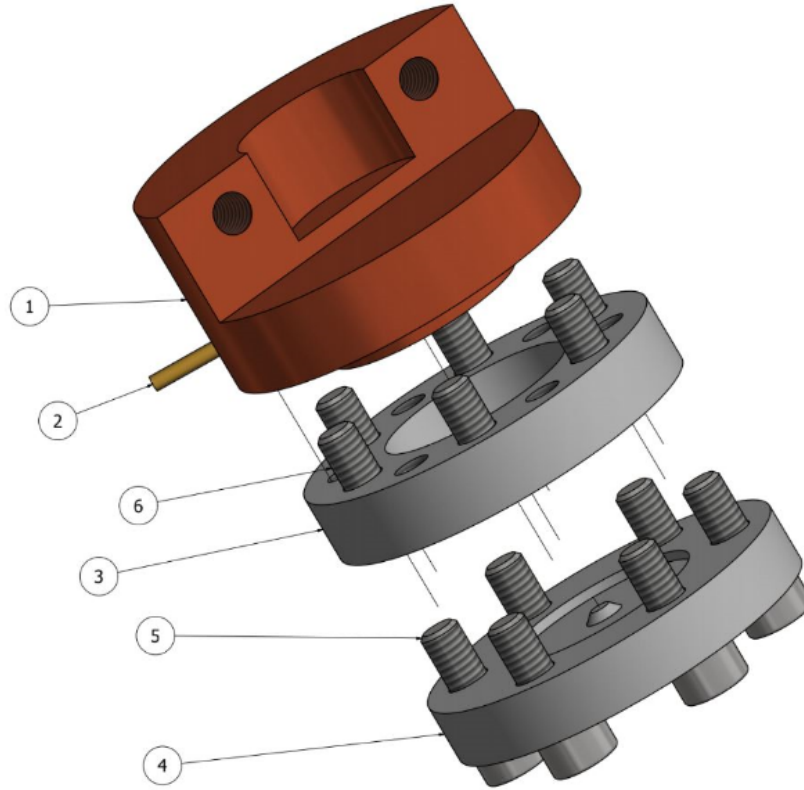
An exploded view of the cavity design. 1) is the copper mount to affix the experiment to the mixing chamber of our dilution refrigerator. 2) is the helium fill line, 3) is the deformable membrane, 4) is the re-entrant stub, 5) and 6) are standard screws. Adapted from personal correspondence with Dr. Fabien Souris.
